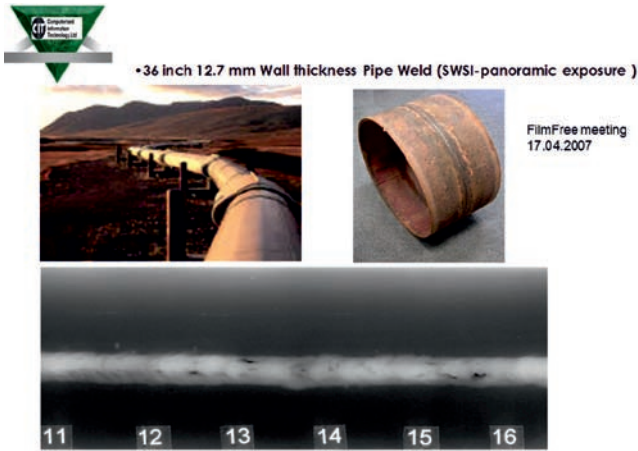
Inspection of welded pipelines with CR [6]
